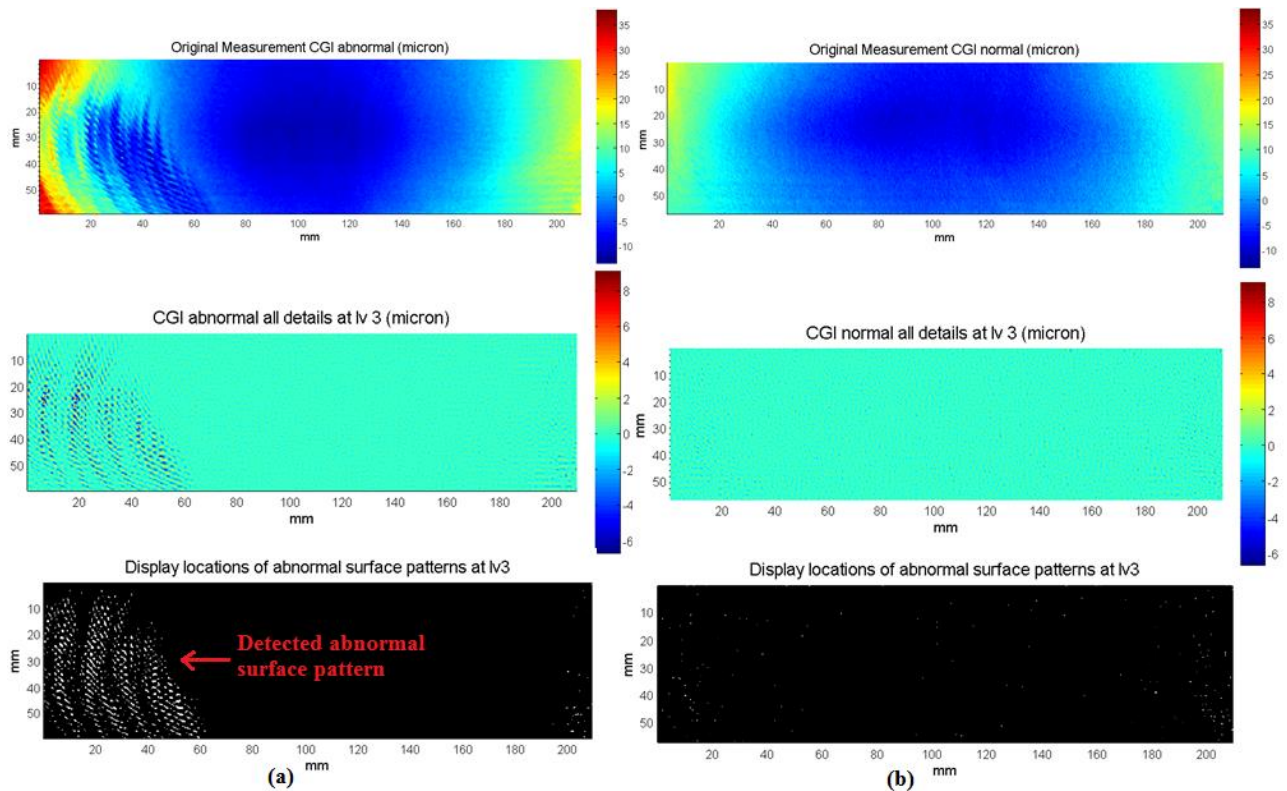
Abnormal surface pattern detection on CGI workpieces: (a) defective, (b) normal
